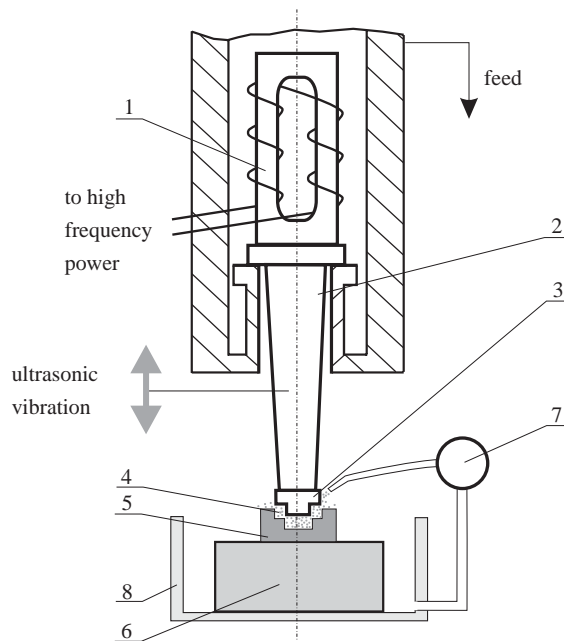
Schematic of conventional USM; 1—magneto-strictive transducer, 2—coupling cone, 3—tool, 4—abrasive slurry, 5—workpiece, 6—fixture, 7—pump, 8—tank.
